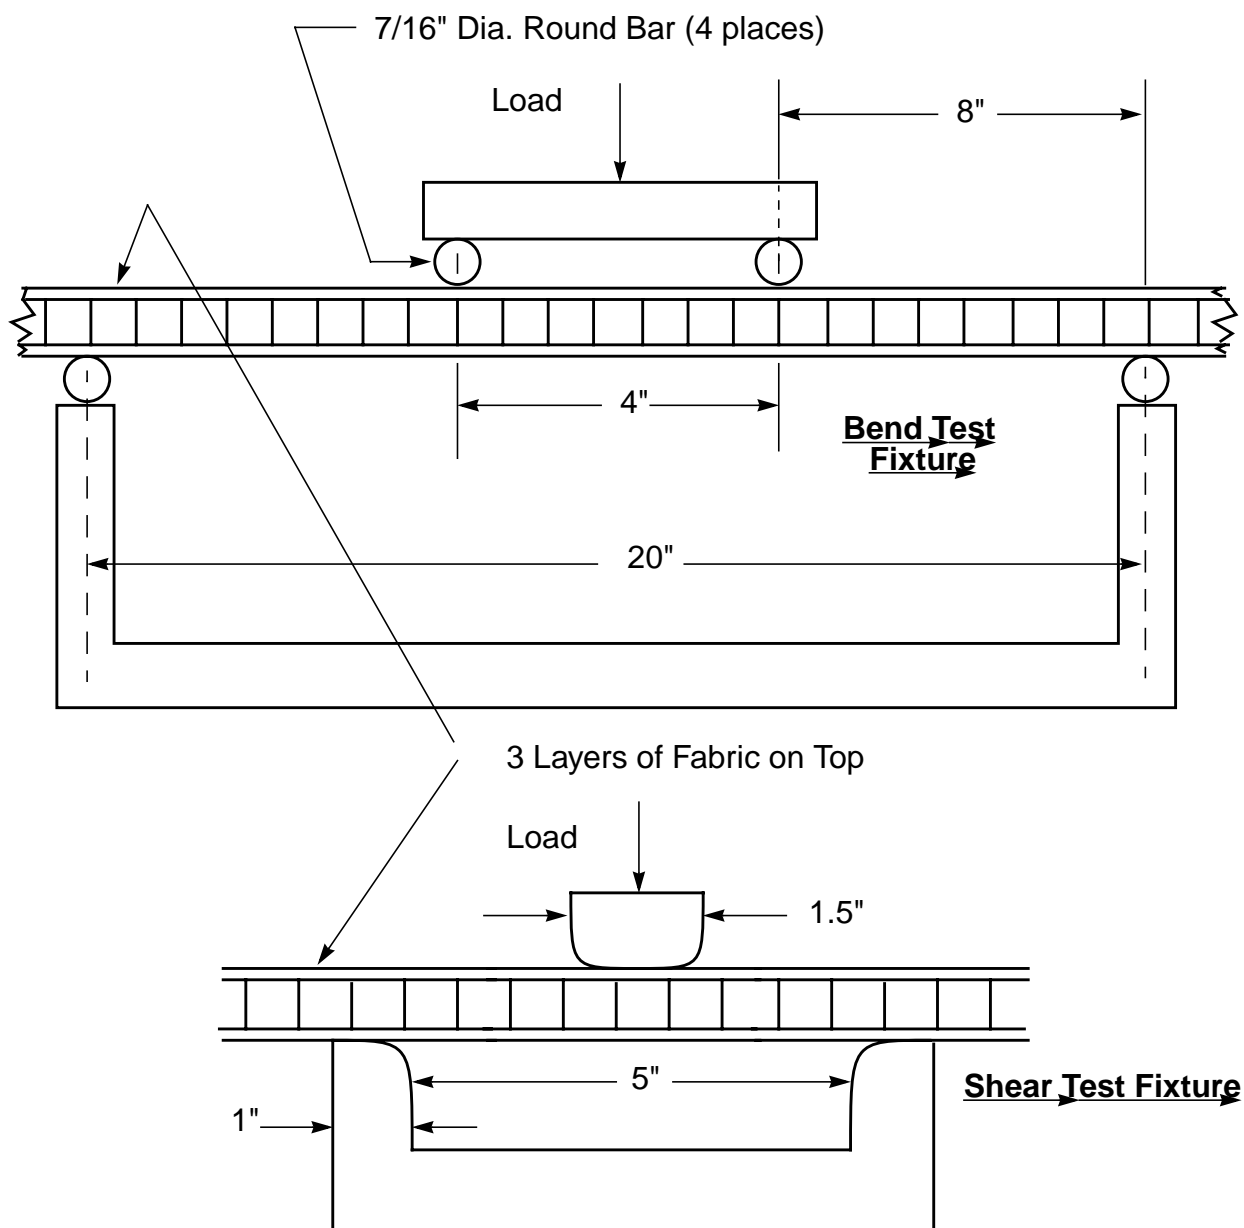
MECHANICAL PROPERTY TESTING FIXTURE FOR COMPOSITE TEST PANEL
